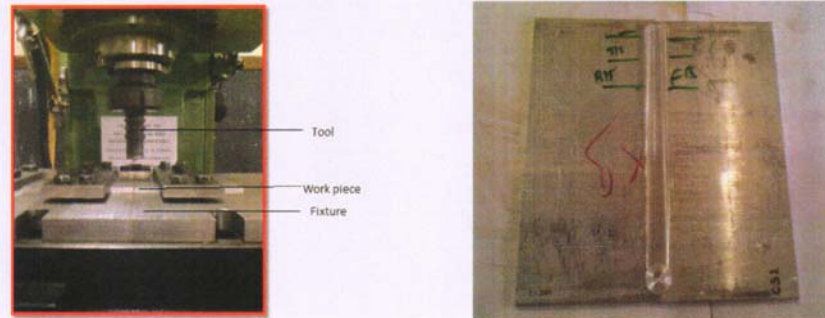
(a) Experimental set up with variable type fixture used for FSW (b) Sample of plates welded by FSW
